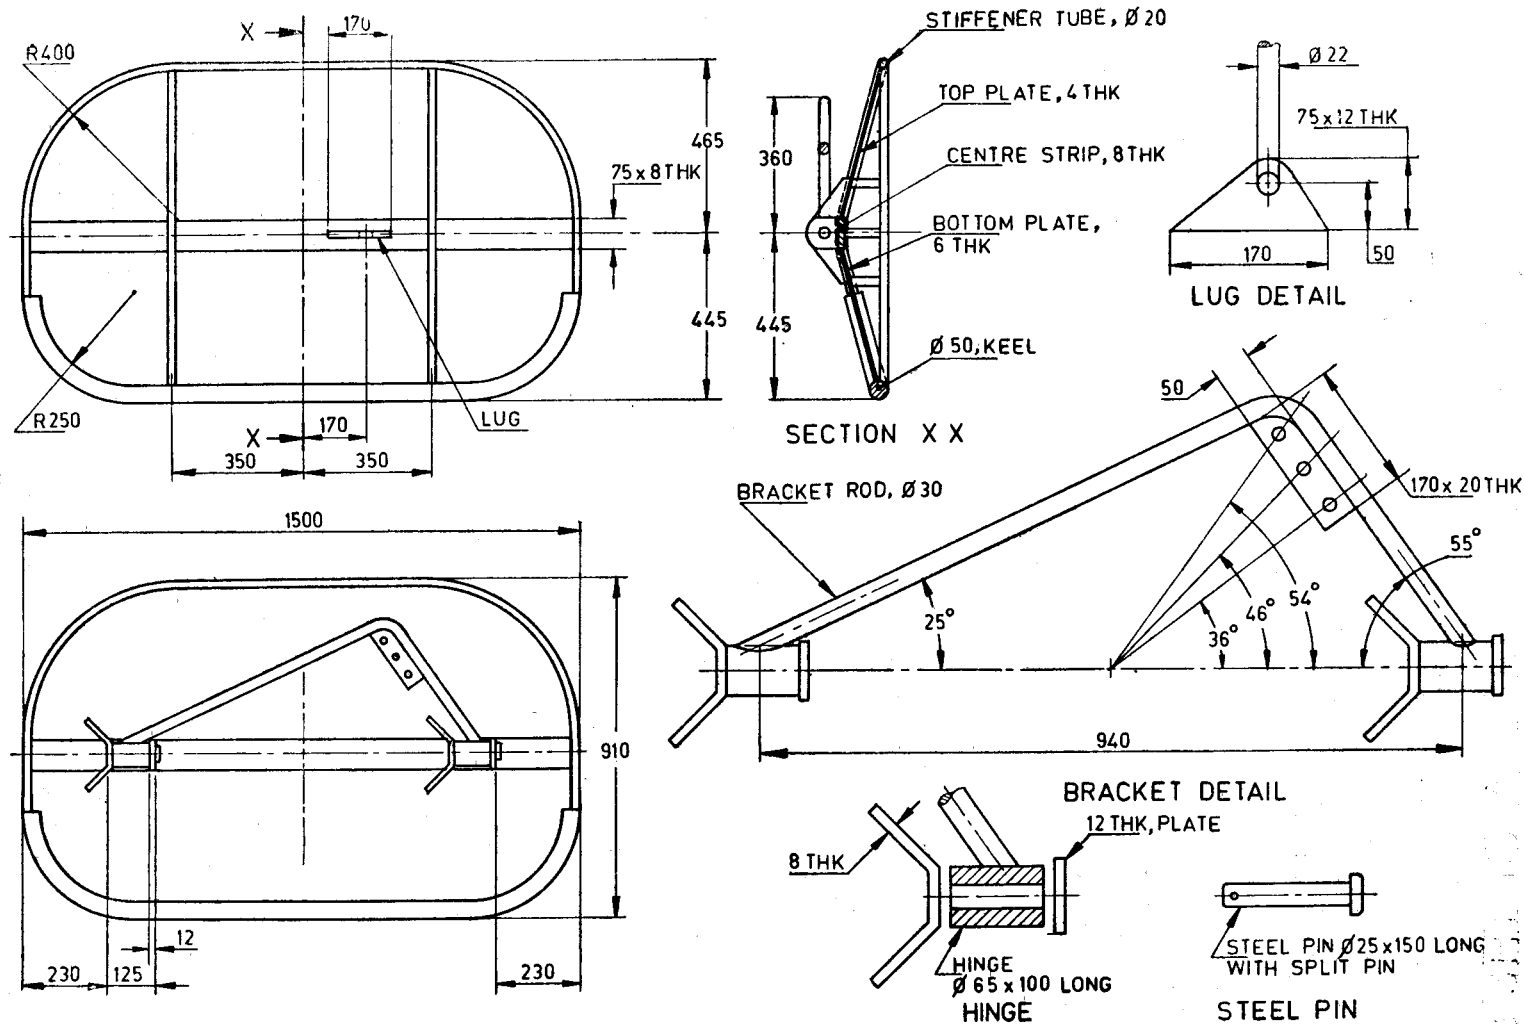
CONSTRUCTION DETAILS OF A TYPICAL RECTANGULAR VEE TYPE OTTER BOARD OF ABOUT 1.3 m<sup>2</sup> AREA
